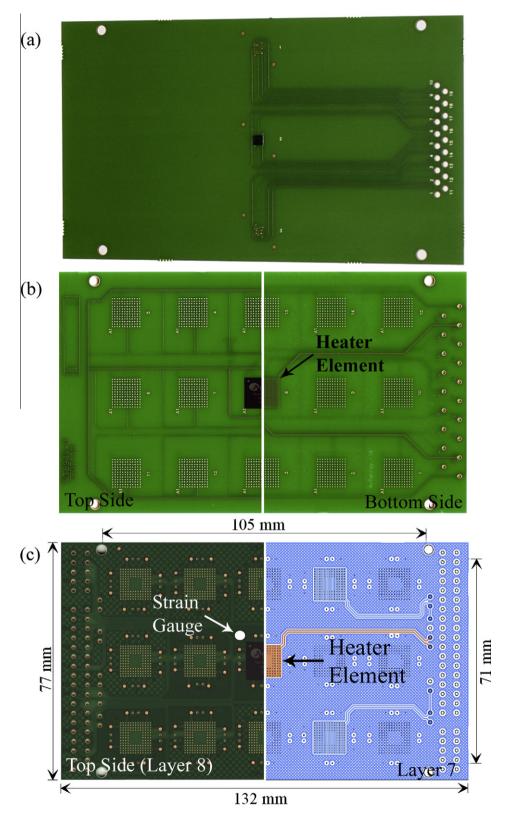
Layouts and structures of the component boards: (a) WL-CSP, (b) CSP-BGA-1, and (c) CSP-BGA-2. All boards had the same dimensions and strain gauge location.
